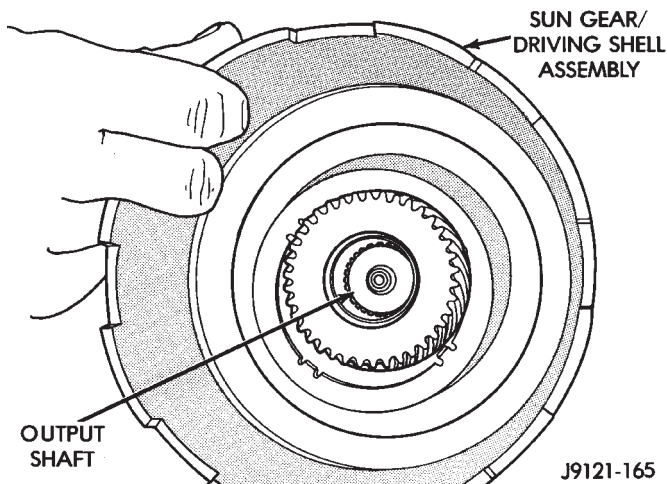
Installing Assembled Sun Gear And Driving Shell On Output Shaft
